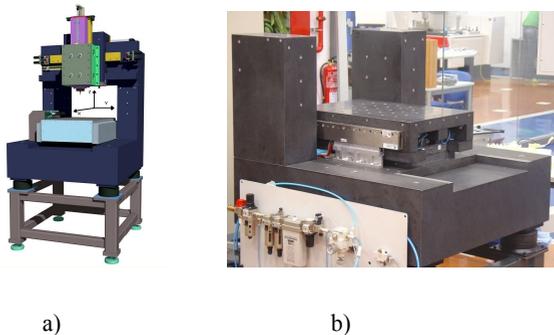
a) Final design of ultraprecision micromilling machine. b) Picture of ultraprecision axis assembled in micromilling bed.
